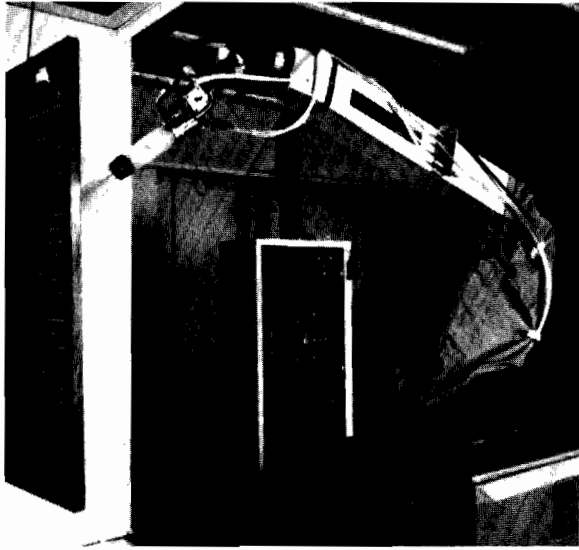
A Cincinnati Milacron welding robot. (Courtesy of Cincinnati Milacron.)
